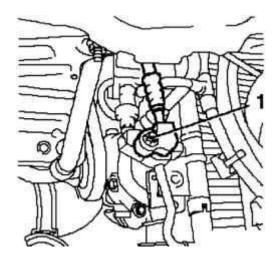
Line circuit cooling system (high pressure side): 1 - screw fixing
